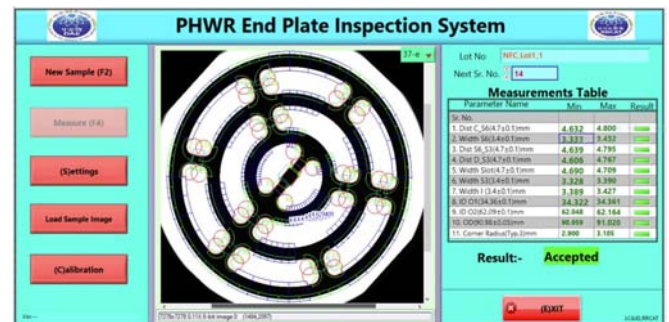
Screenshot of inspection software for fuel bundle end plate dimensional inspection system.
